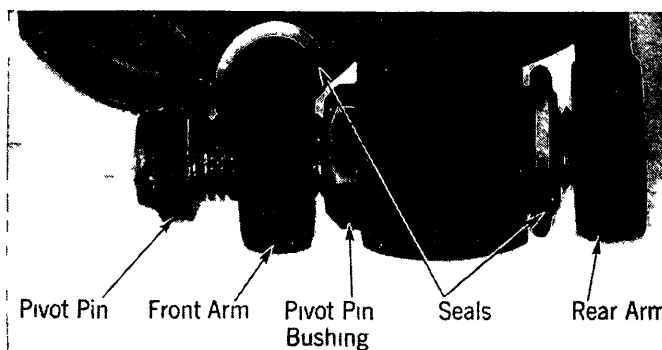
Position of seals before installing lower pivot pin. 1939-48
